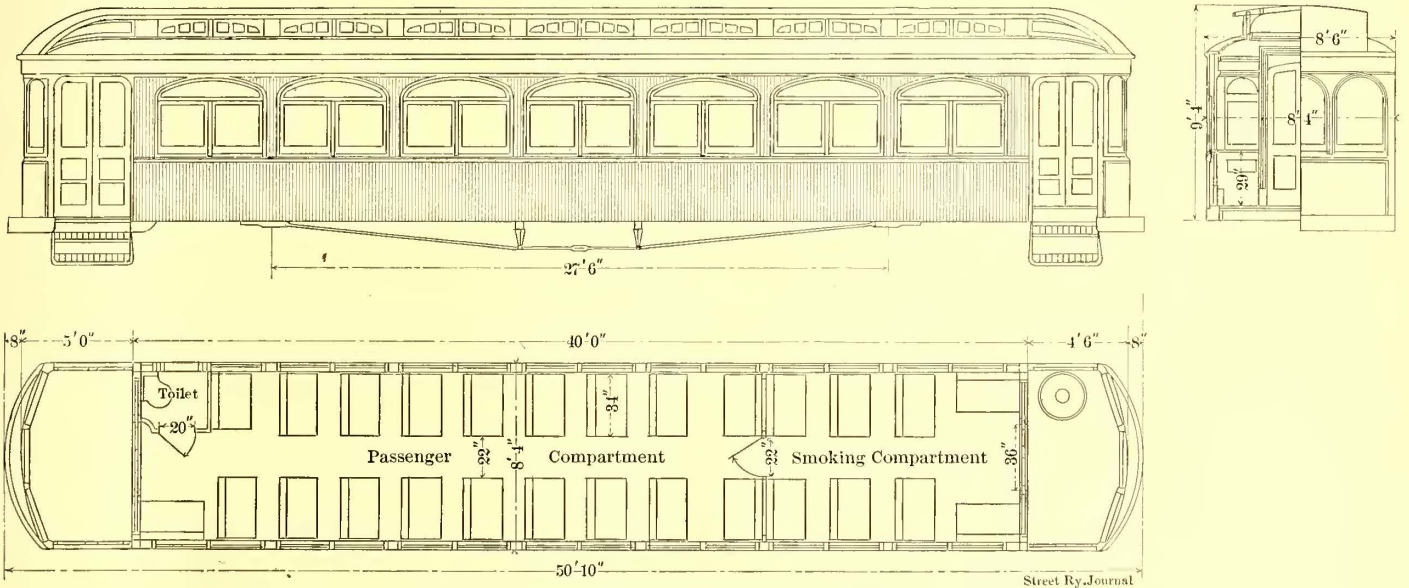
SIDE ELEVATION AND PLAN OF MODERN INTERURBAN CAR
